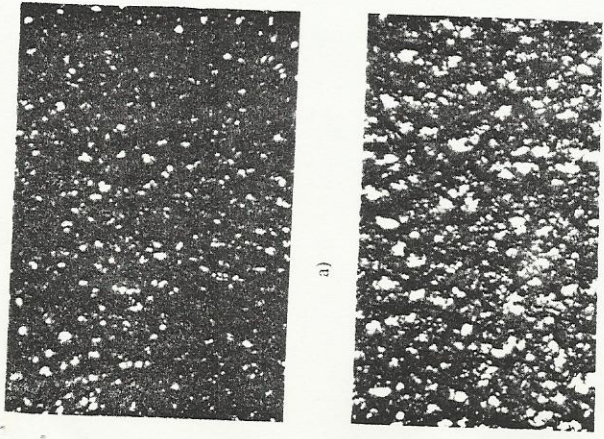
Photographs of machined surface after 225 min. of machining of stainless steel with: a) brass tool, b) stainless steel tool.
